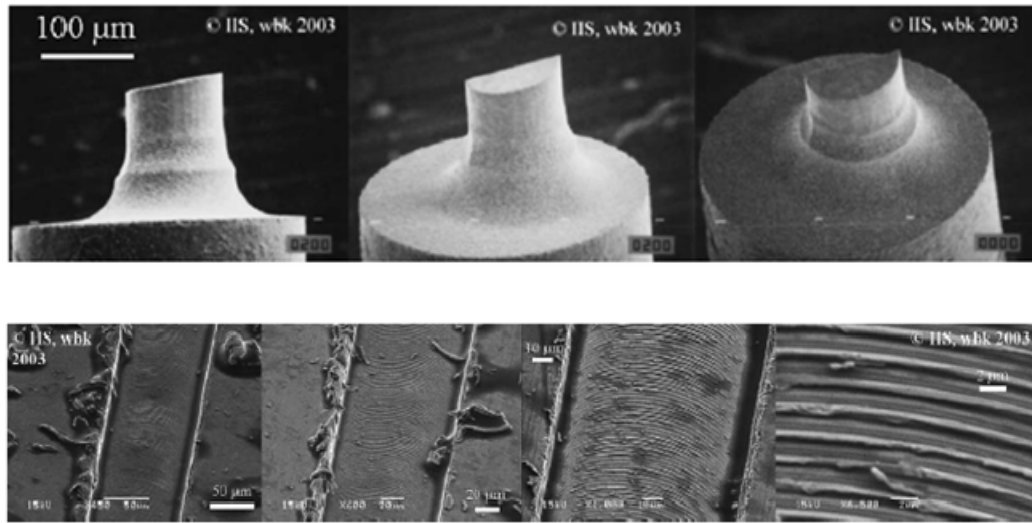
Top row shows micro-EDM machined milling tools in tungsten carbide, diameter 100μm and the bottom row shows machined slots on brass workpiece (Fleischer, J., et al., 2004).
